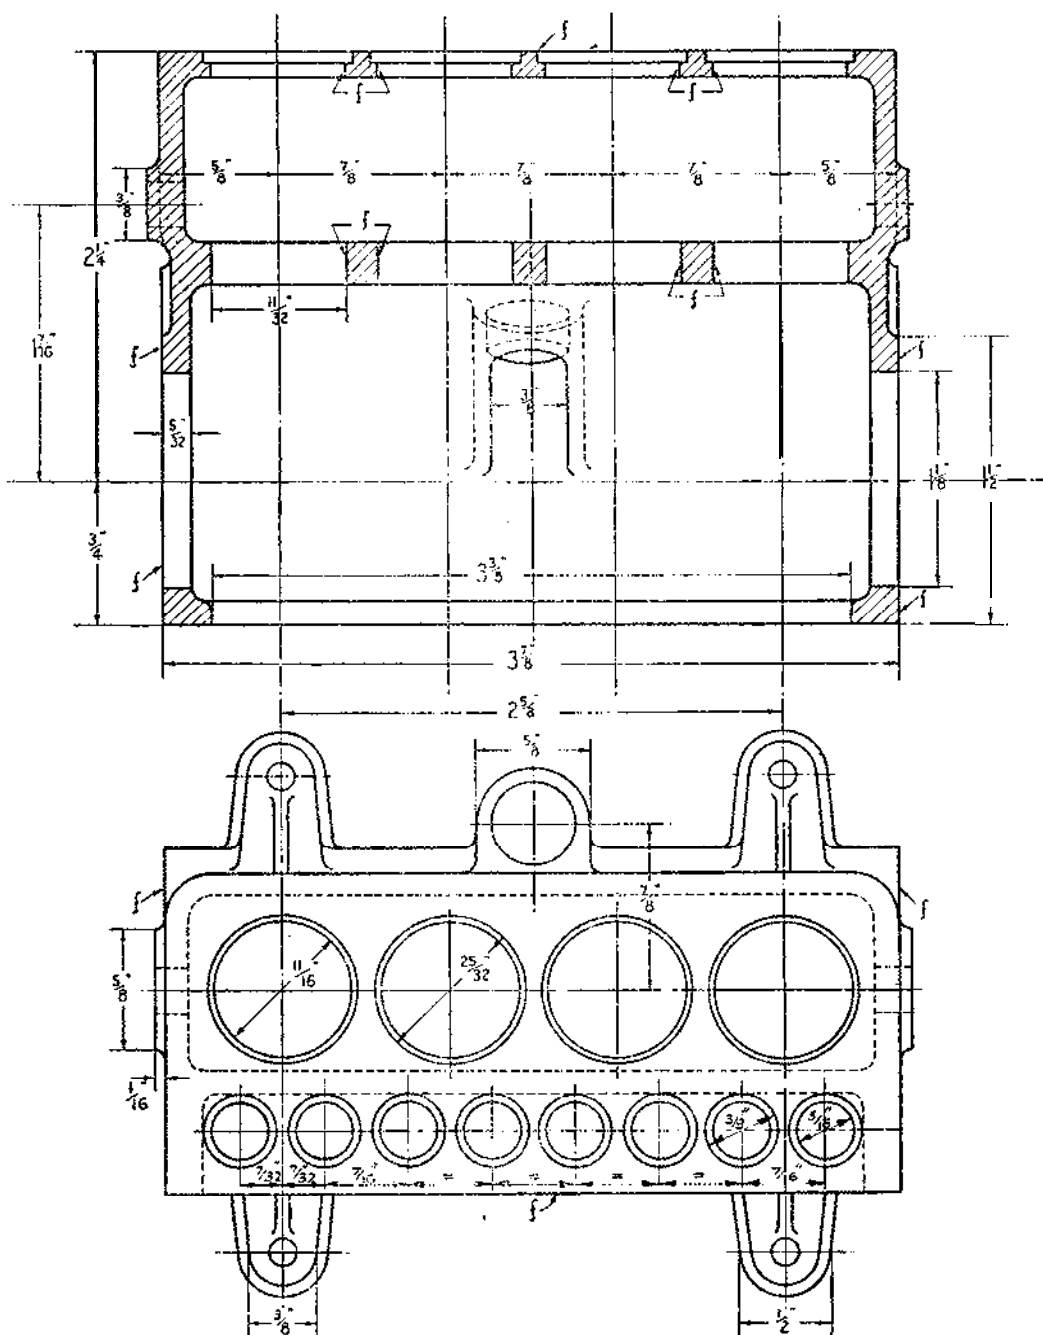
Sectional side elevation and plan of cylinder and crankcase block
